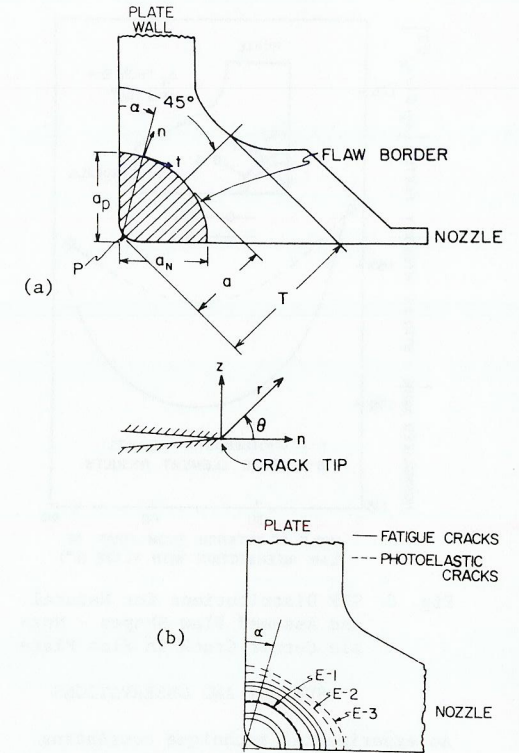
(a) Problem Geometry, Notation and (b) Flaw Shapes for Nozzle Corner Cracks in Flat Plates
